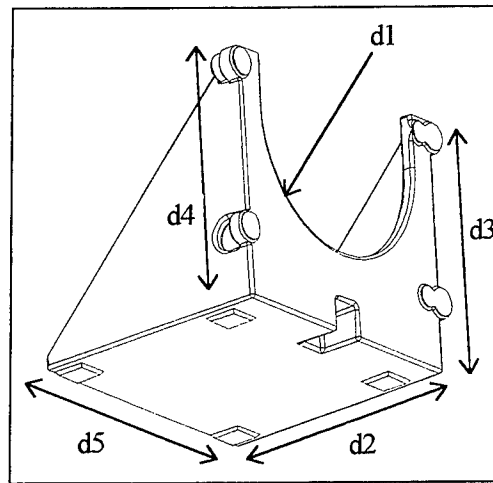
3D CAD model of part used in this investigation, showing dimensions used over.
